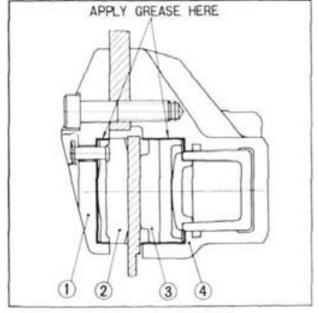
(1) Caliper B (3) Pad A (2) Pad A (4) Caliper B
